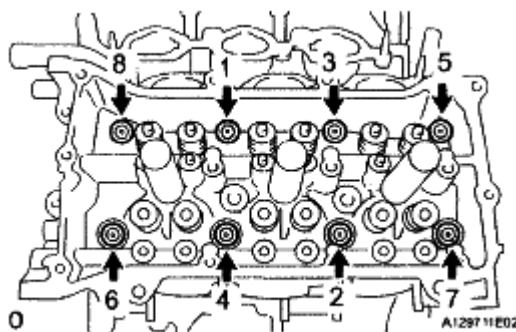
Tightening Cylinder Head And Plate Washers In Sequence
